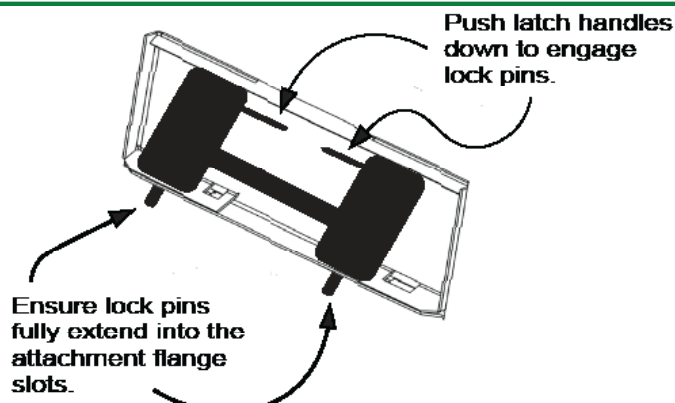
B QUICK ATTACH COUPLER LOCKED TO ATTACHMENT PLATE
